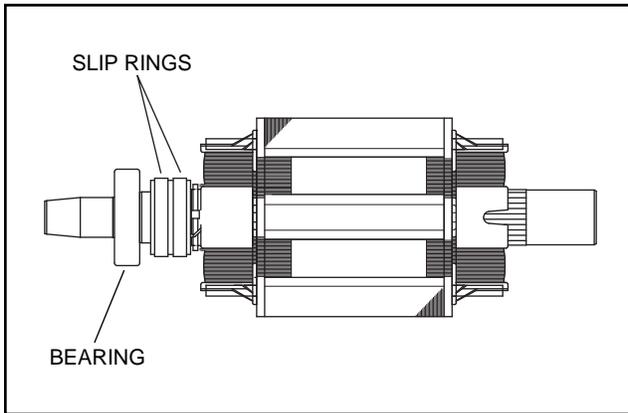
The 2-Pole Rotor Assembly 12-20 kW
